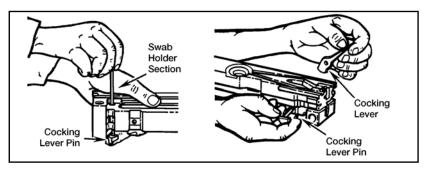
Removal of the cocking lever pin and cocking lever
